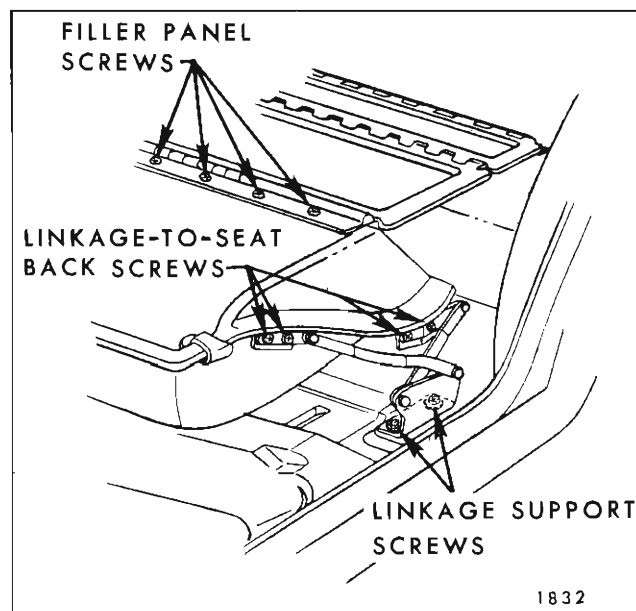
H20—Folding Second Seat Back Linkage and Filler Panel
